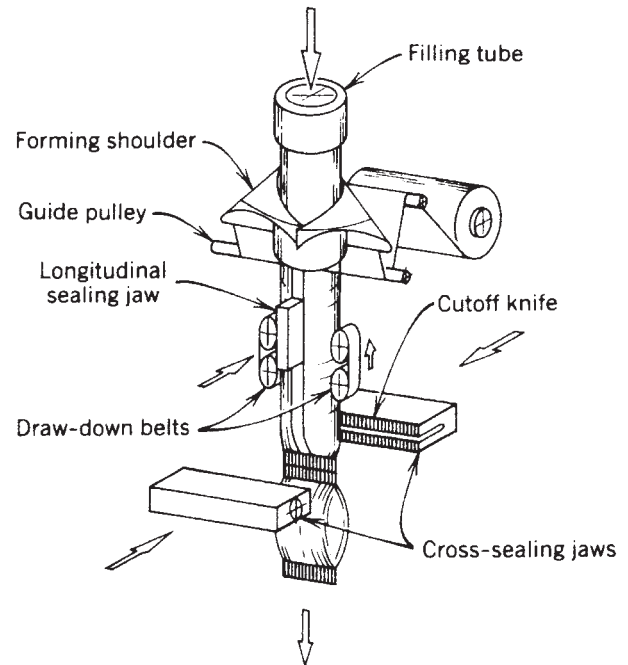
Typical film feed path through a vertical form/fill/seal machine.
